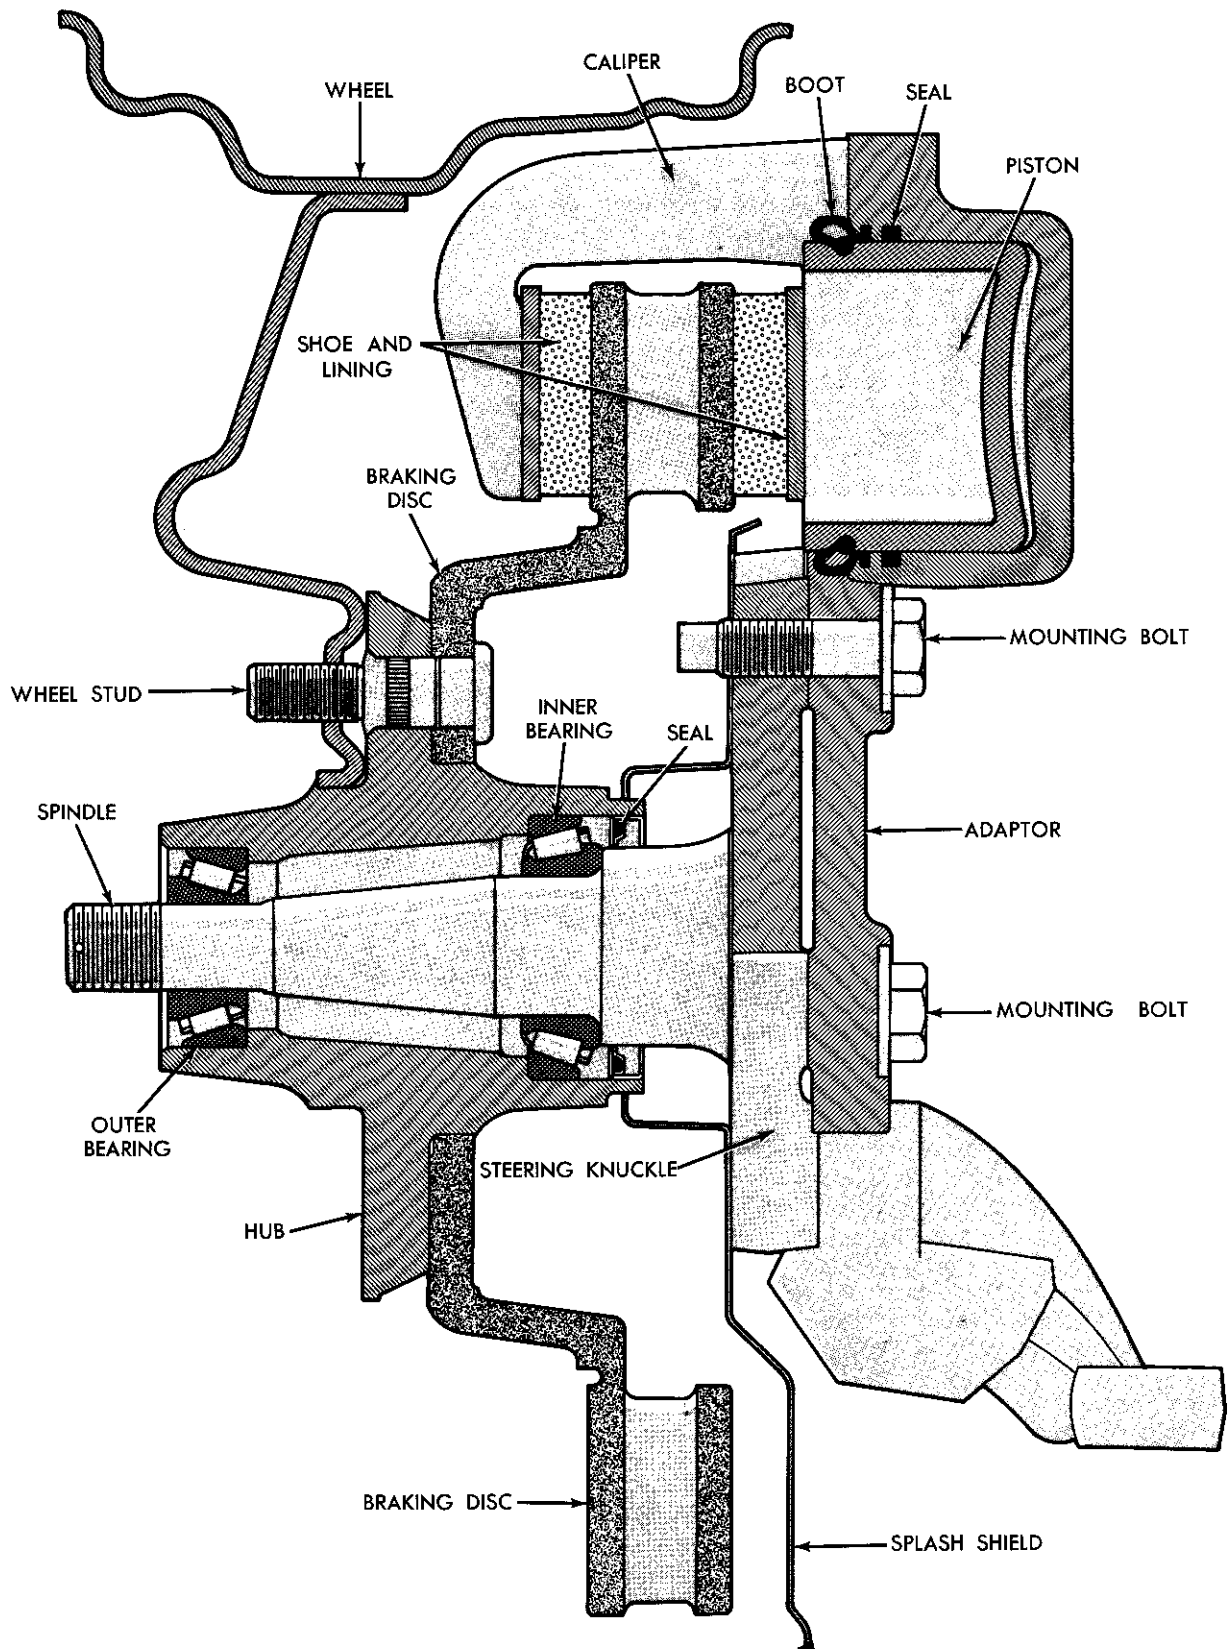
Floating Caliper Assembly (Sectional) Shoe Mounting
